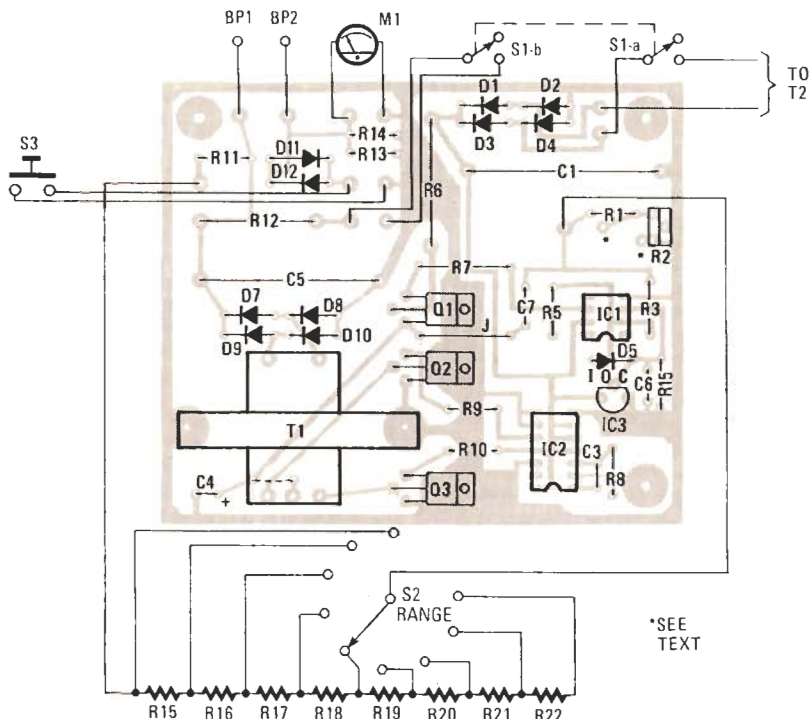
FOR SAFETY, this project requires a PC board. Here we see the parts-placement diagram for the board shown in our PC Service section.
